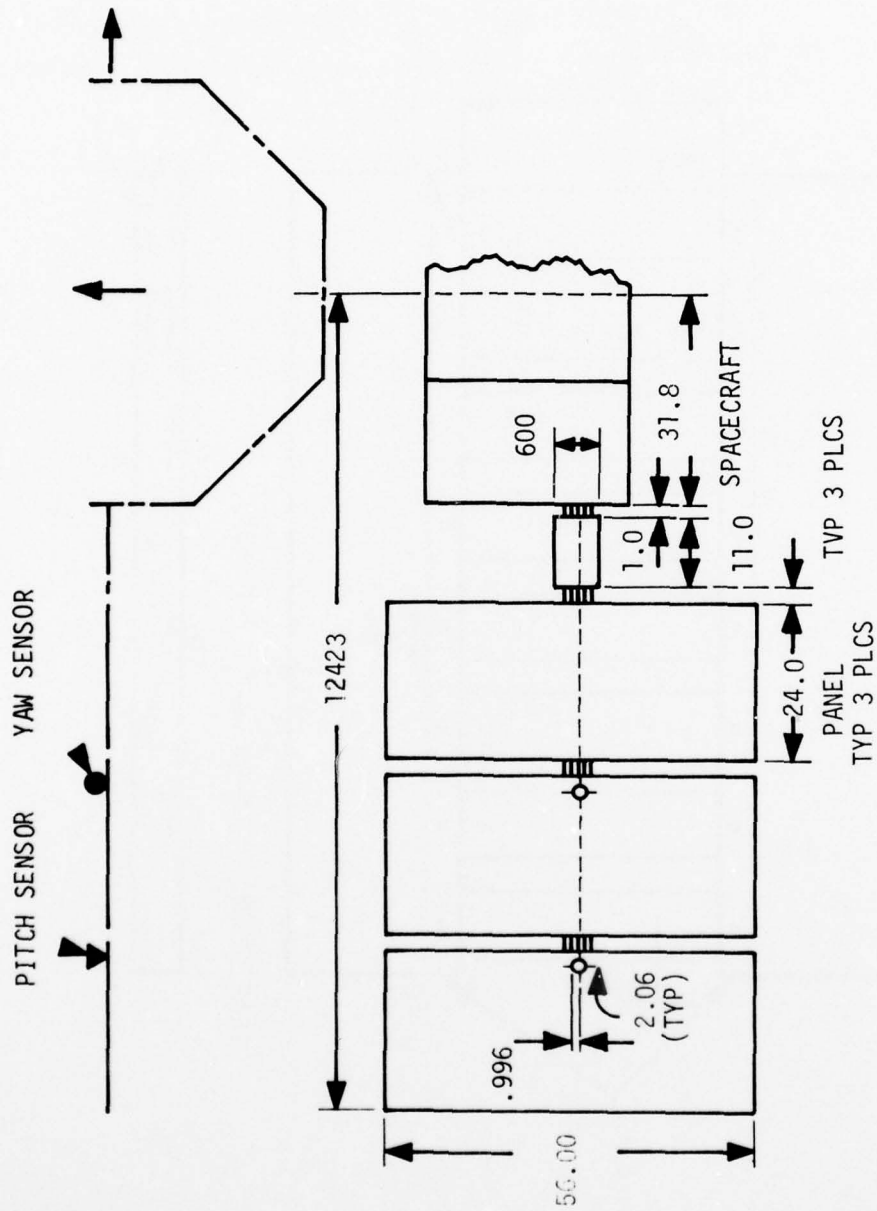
Deployed Solar Array Configuration (NTS-2)
